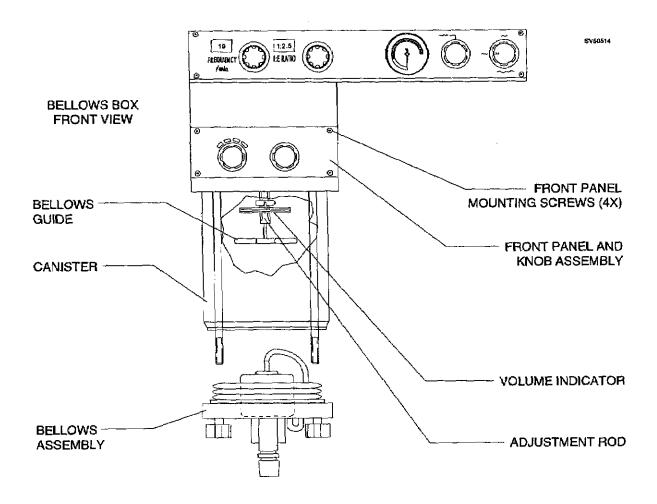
TIDAL VOLUME ADJ. & VALVE CASE ASSEMBLY
